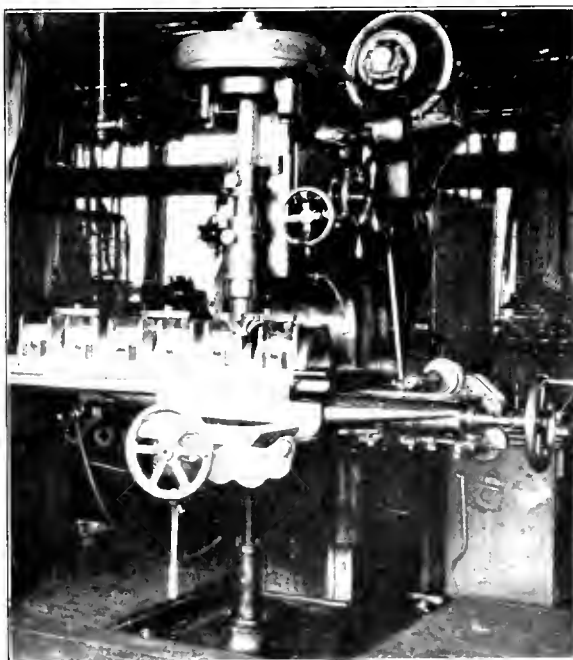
Milling the Flange Corners of the Main Rod Brasses
